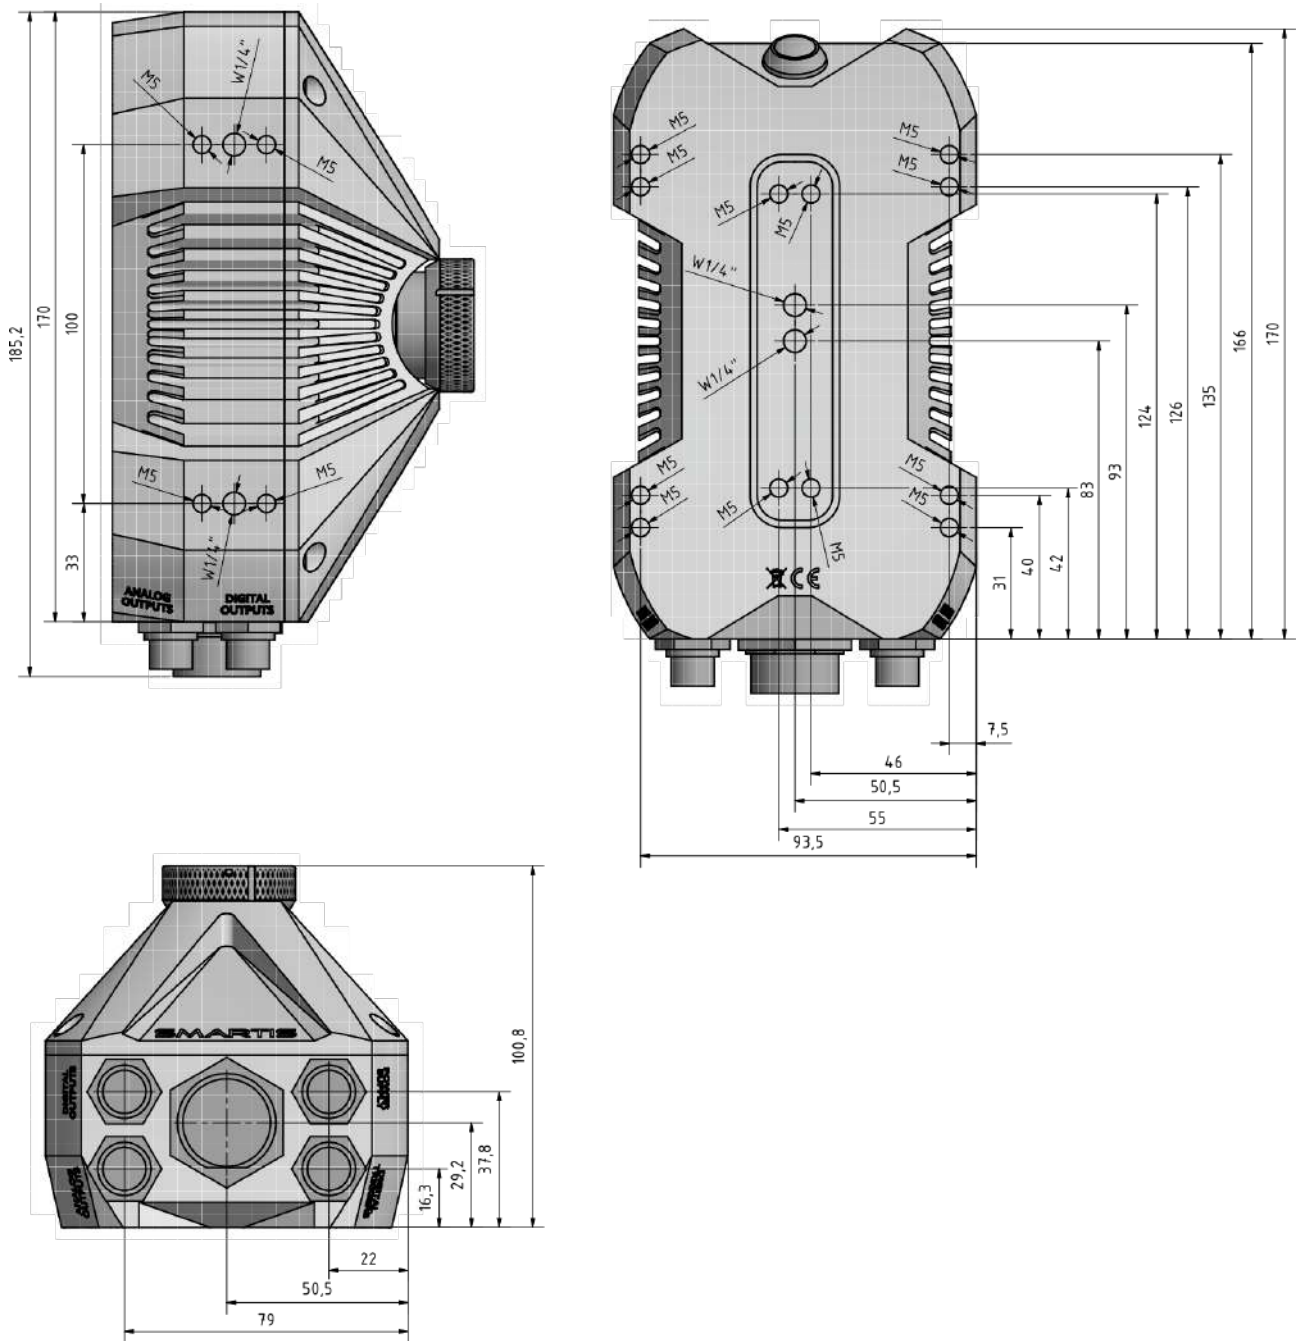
SMARTIS mechanical drawings and dimensions.
